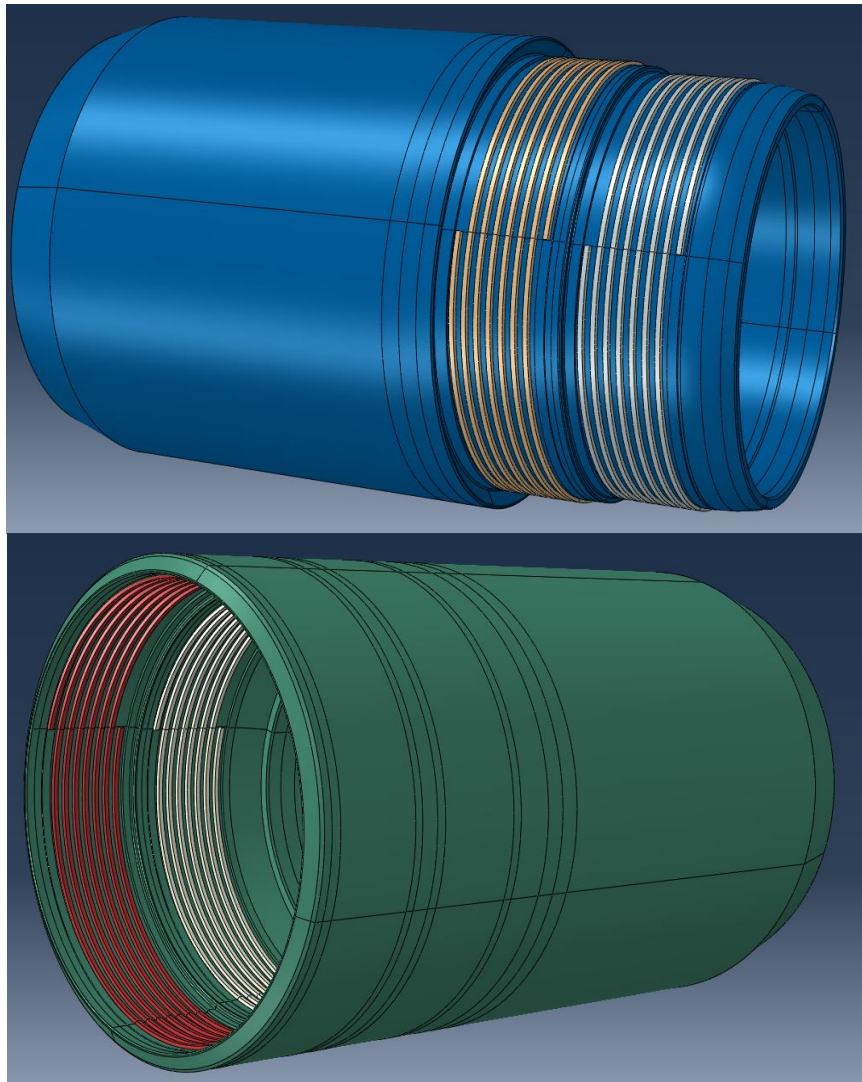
MIJ premium connection full 360° 3D with helical thread pin (top) and box (bottom).
